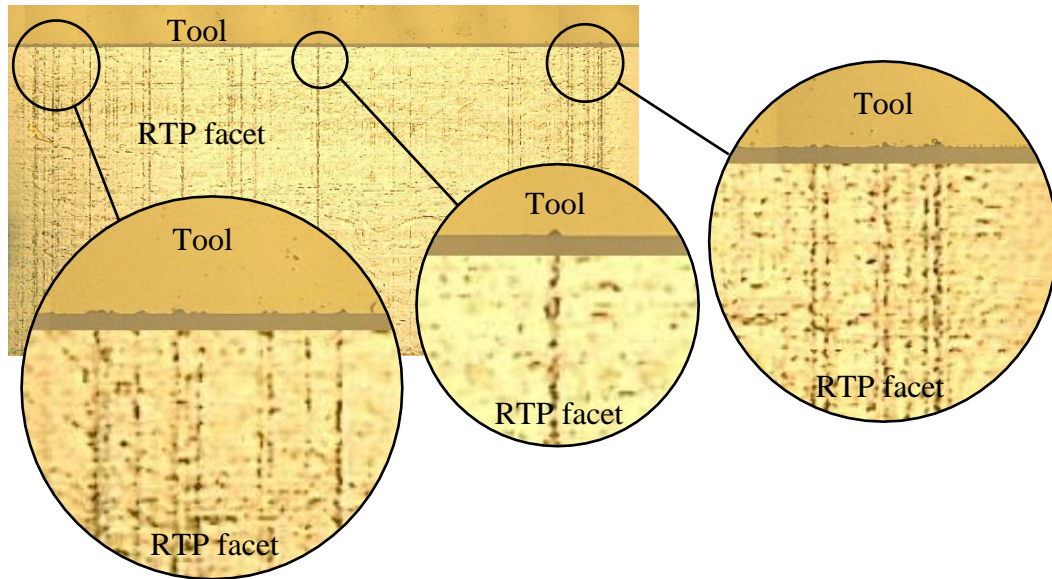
RTP facet scratches caused by chipping of the diamond tool cutting edge.
